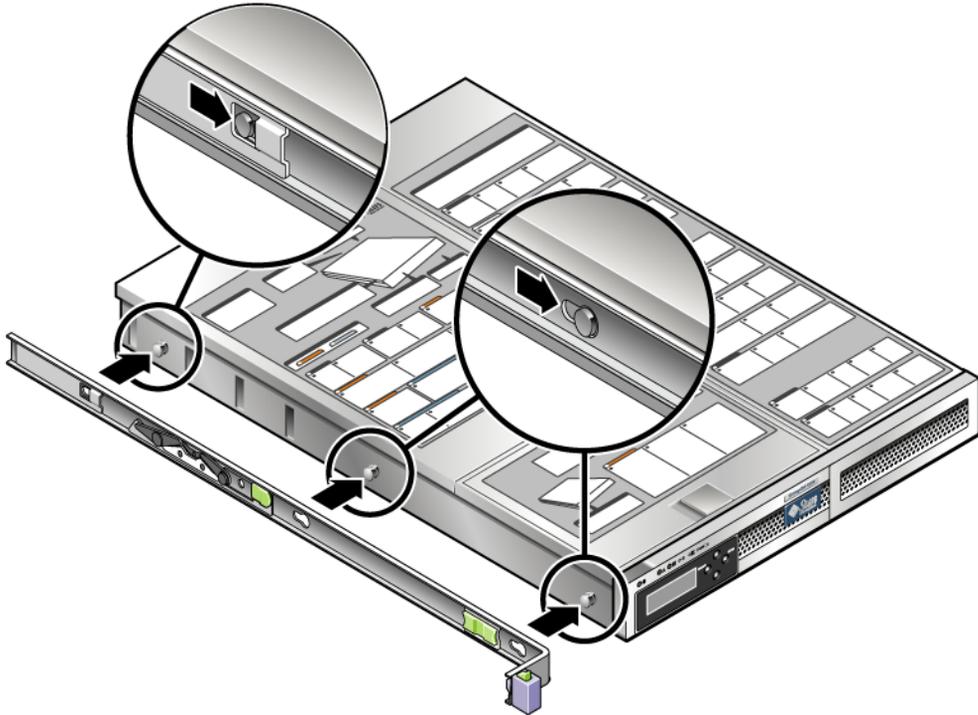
Attaching a Mounting Bracket to the Chassis
